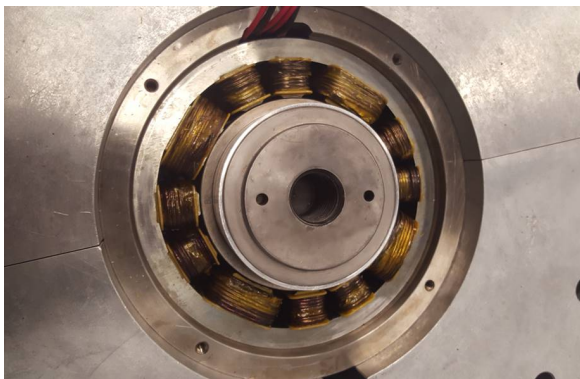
Upper radial bearing installed in turbo-aerator housing.
